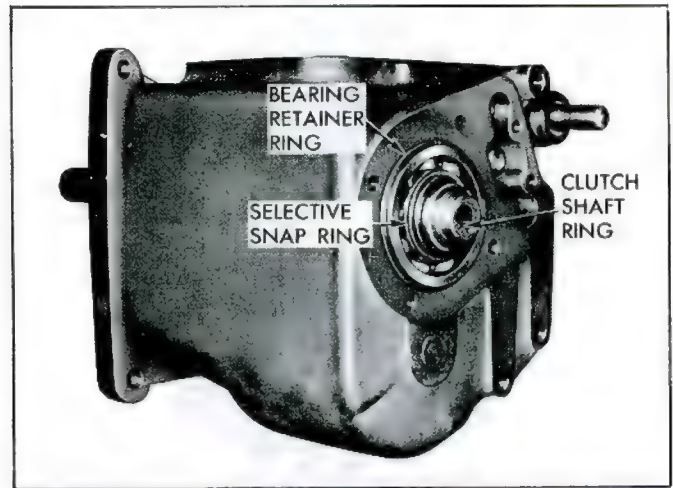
B-21—Clutch Gear and Bearing Snap Rings
